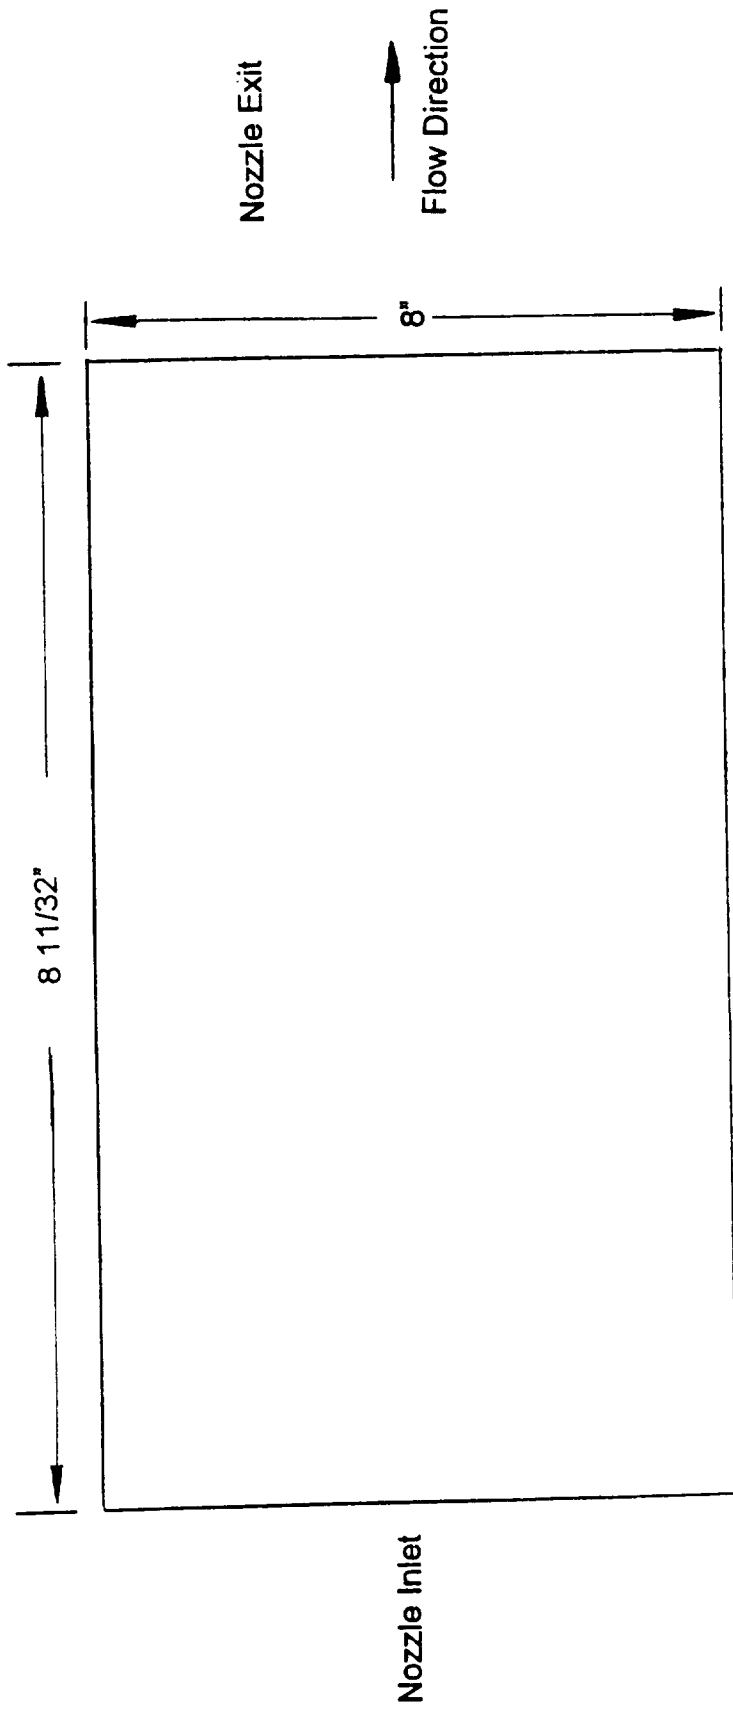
A. Redesigned Eight Inch Nozzle, Top View
